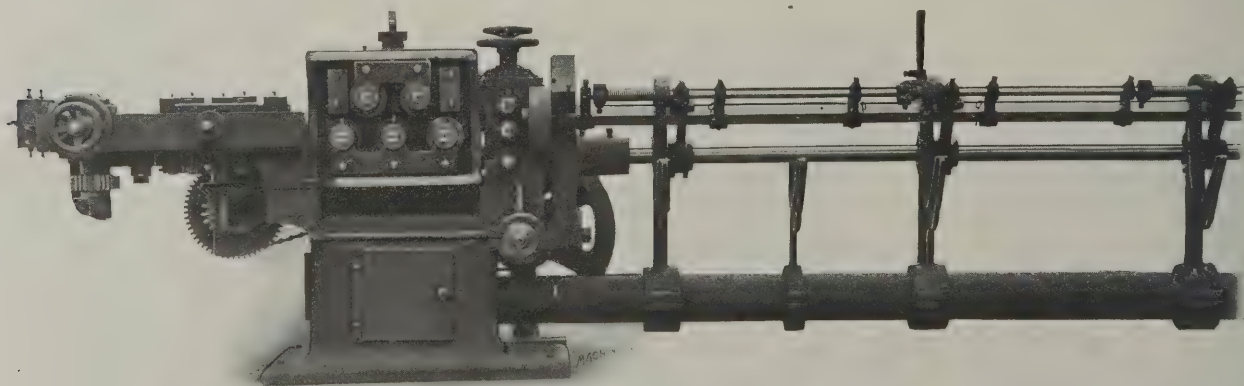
Side View of Shuster Geared-roll Stock Straightener and Cutter
